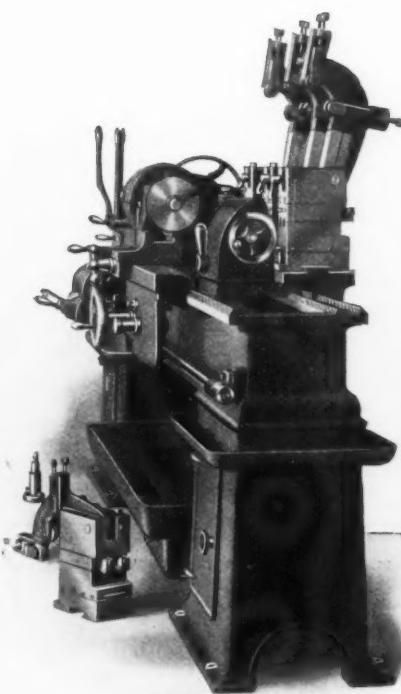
An End View of the Lathe, Showing the Tool Blocks Behind the Tailstock.
